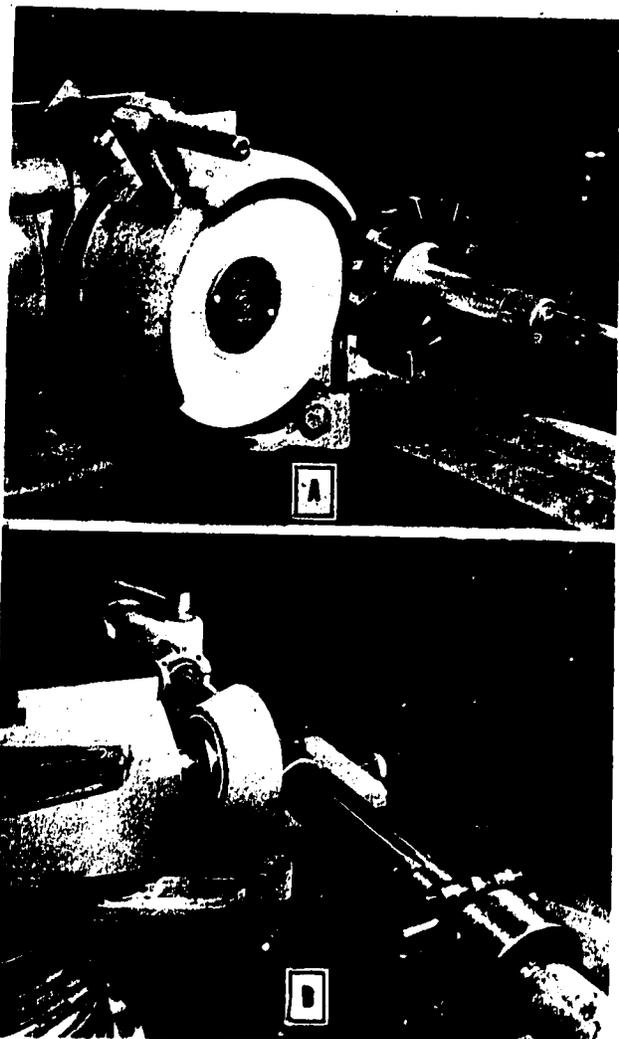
shows two methods for grinding cylindrical cutting tools on a tool and cutter grinder. Part A of figure 13-9 shows a setup for grinding a staggered tooth cutter using a straight wheel. Part B of figure 13-9 shows a setup for grinding a reamer using a cup type wheel. Either type of wheel can be used; the cup type wheel produces a straight clearance angle; the straight wheel produces a hollow ground clearance angle.
